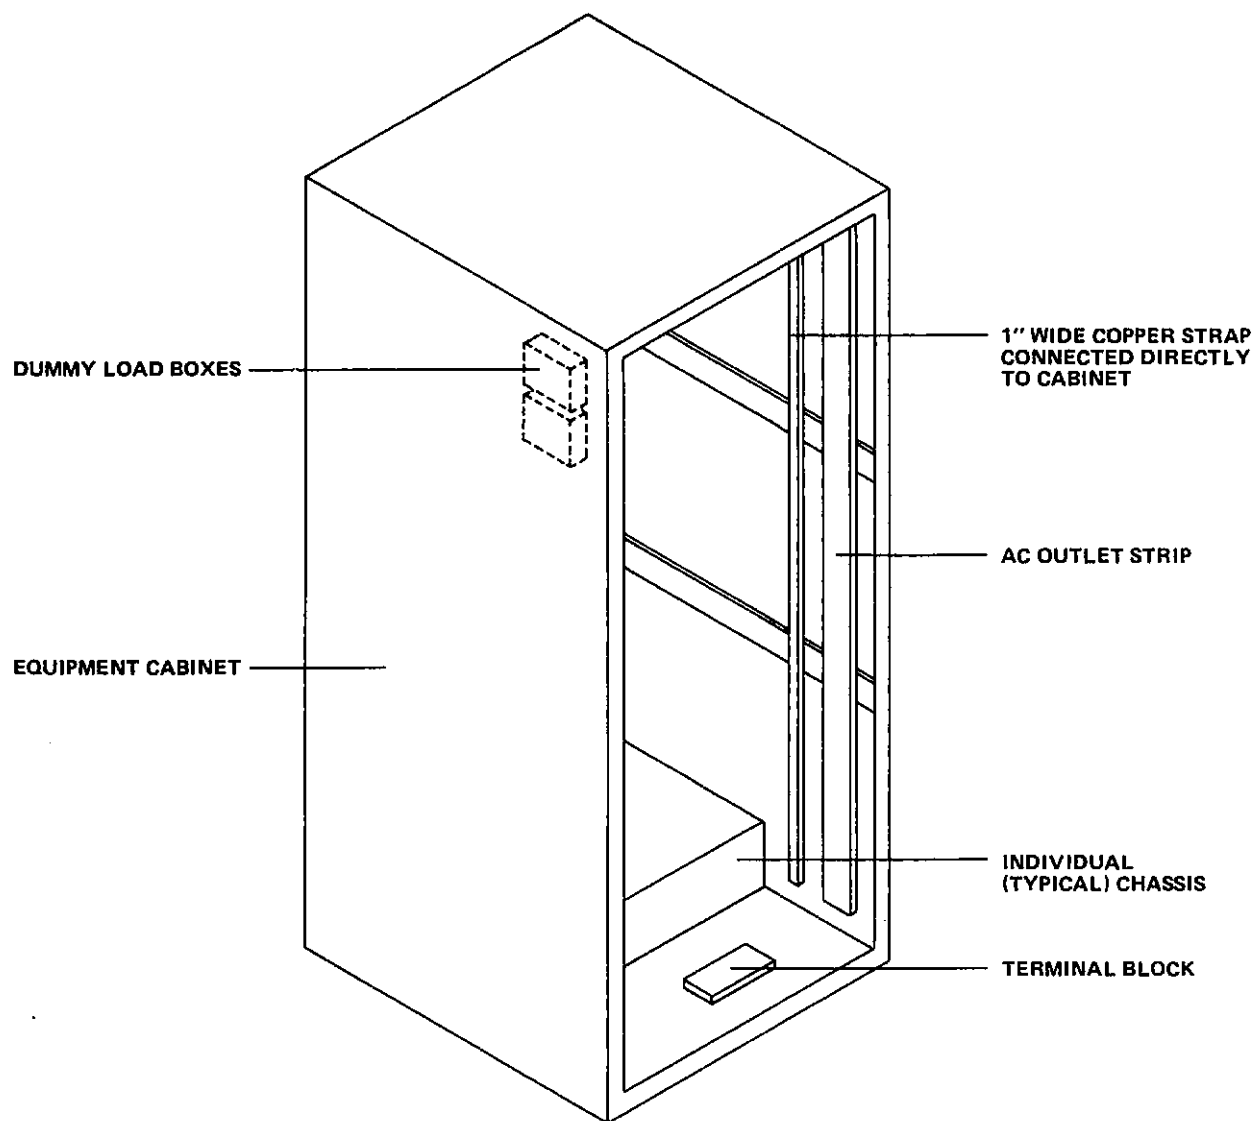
Electrical Equipment Cabinet (Rear View)
